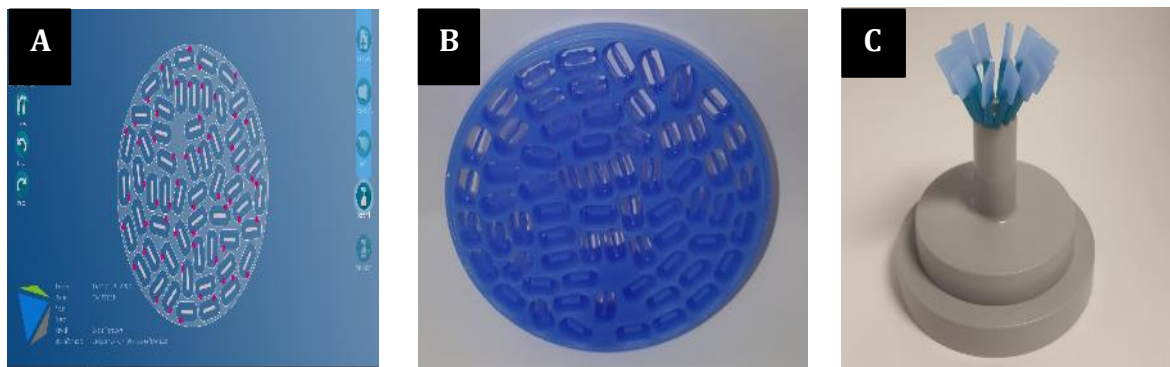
A) CAD design of specimens B) Milled was disc C) Sprued specimens ready for investment
